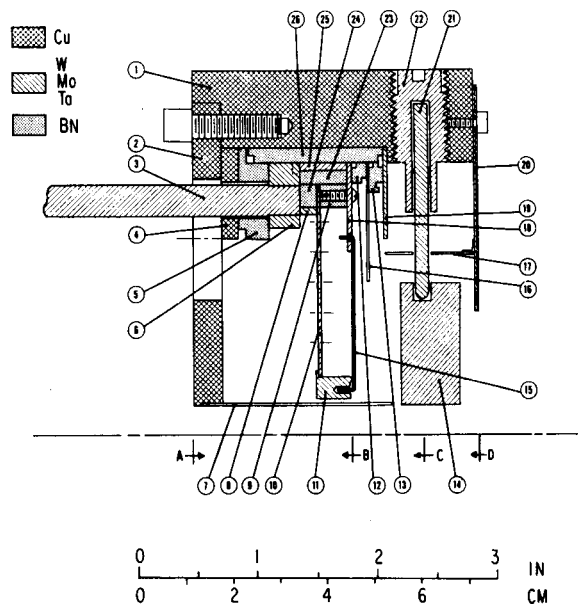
Diagram of one-half of the cross section of the hot plate assembly.
